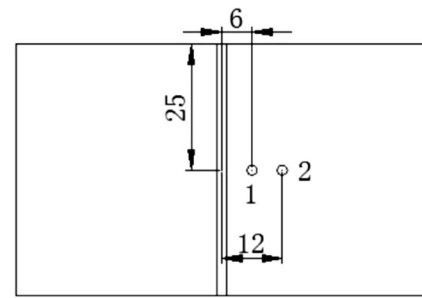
Temperature measurement locations in the actual weld sample (dimensions in mm)
